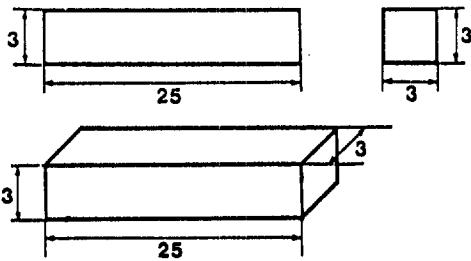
Specimen for flexural strength measurement (unit: mm)
